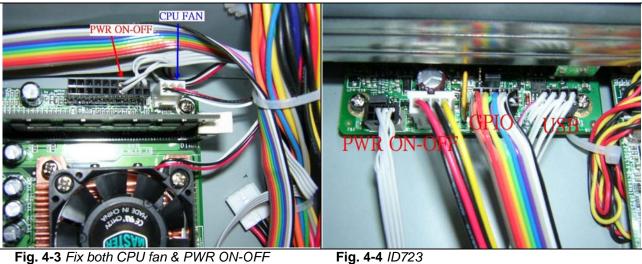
Fix both CPU fan & PWR ON-OFF cables.
